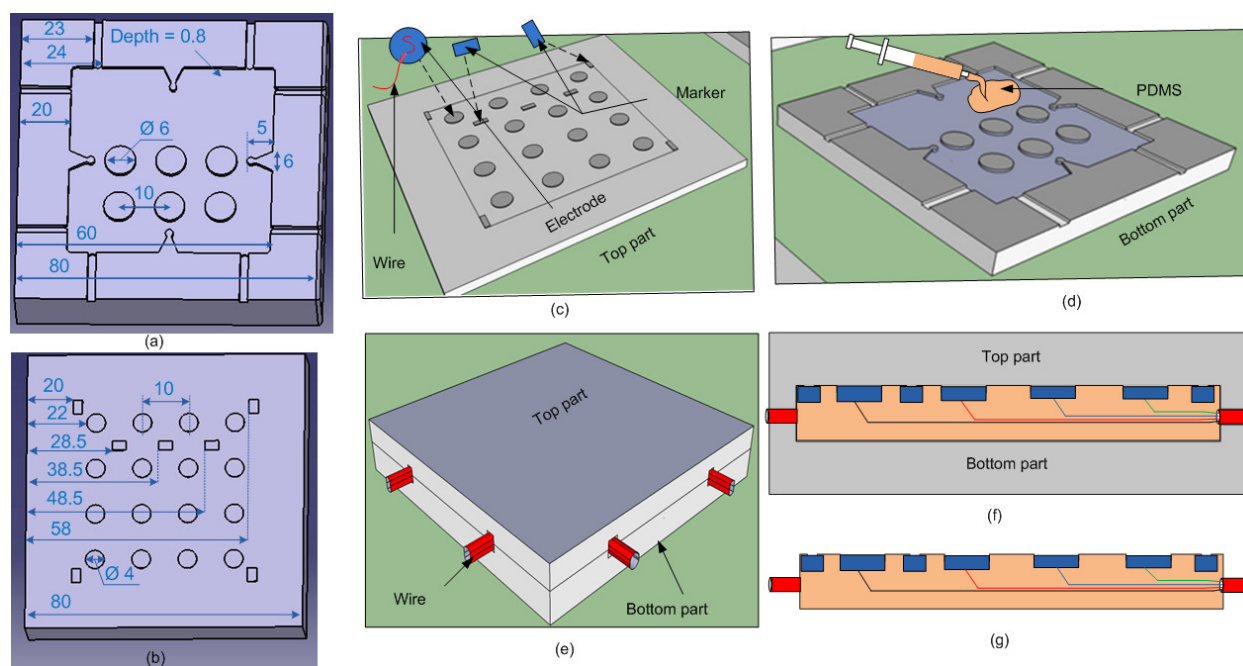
Fabrication process: (a)-(b) Design of mini-grid electrodes mould structures of top (a) and bottom (b) parts using CATIA software and (c)-(g) Assembling and packaging process: assembling of electrodes and markers (c), pouring of silicone on the mould (d), attachment of both parts (e) and cross section of assembly (f), and cross section of fabricated mini-grid electrodes (g).
